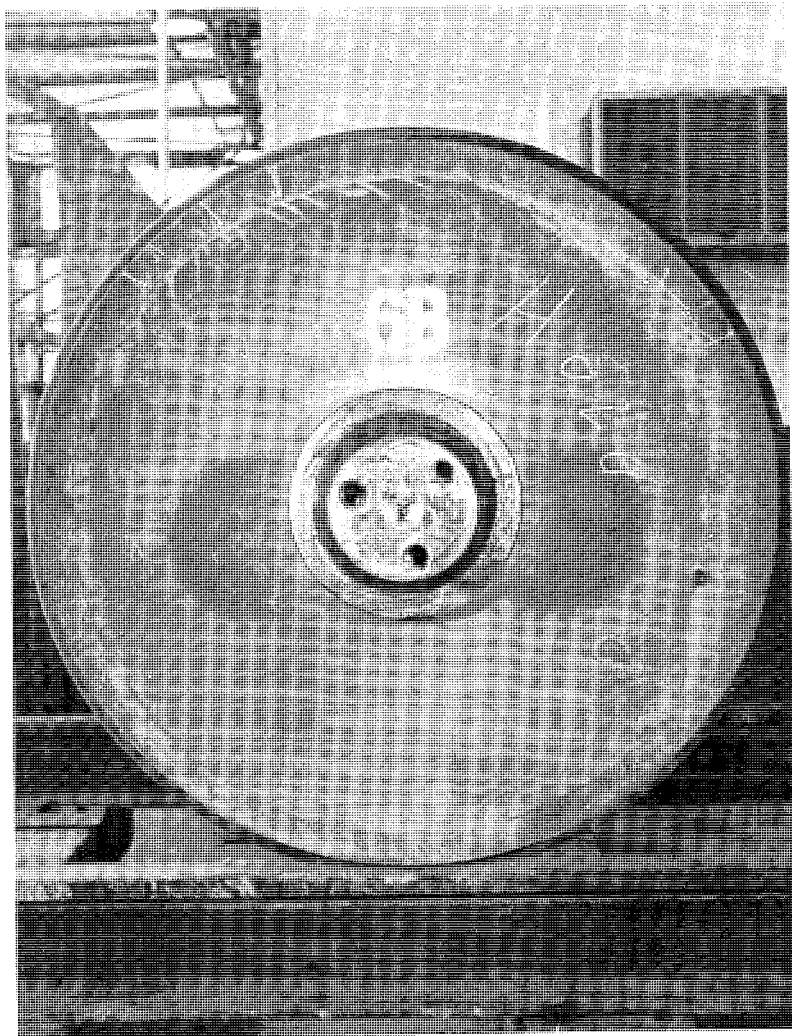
View of Wheel 6B, Location of Thermal Cracks
